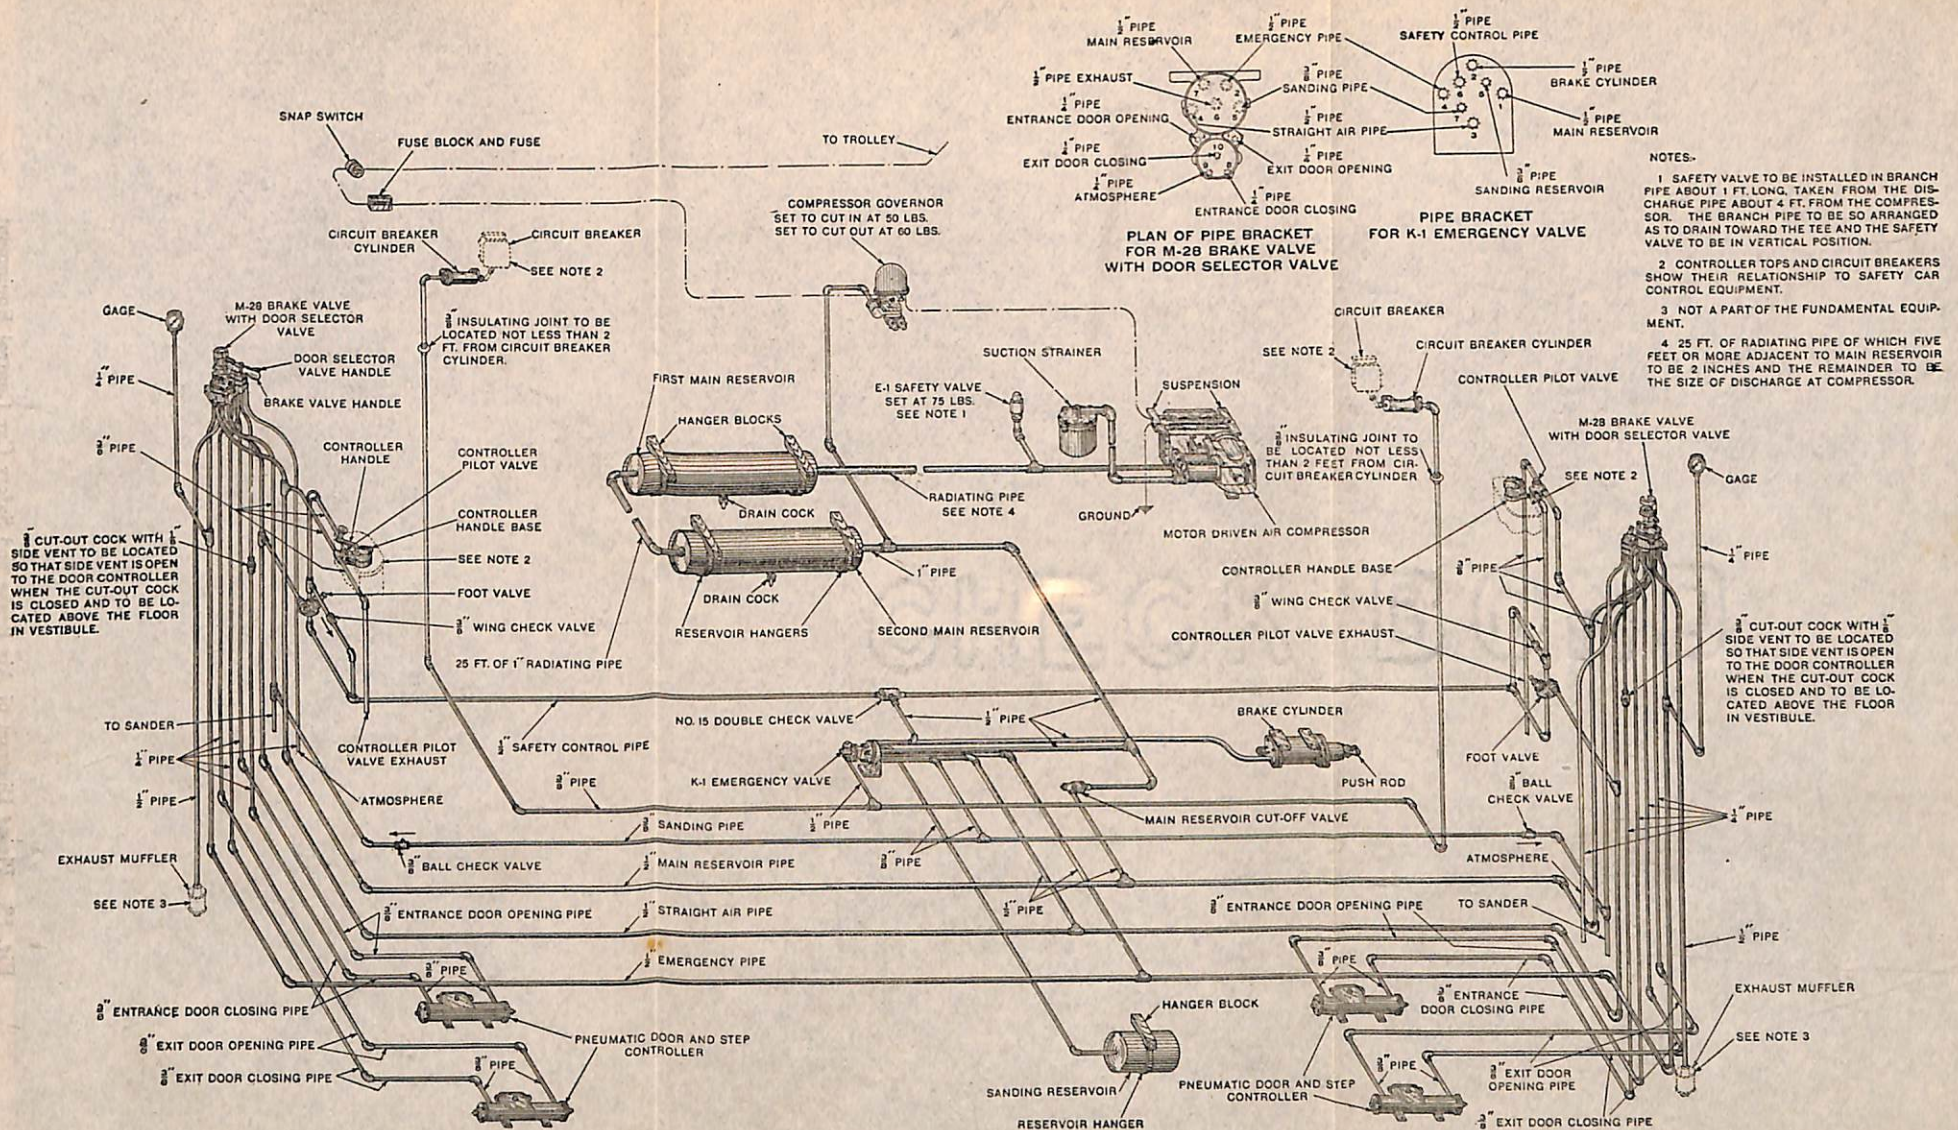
Piping Diagram of Air Brake and Safety Car Control Equipment with M-28 Brake Valve having Selector Valve
